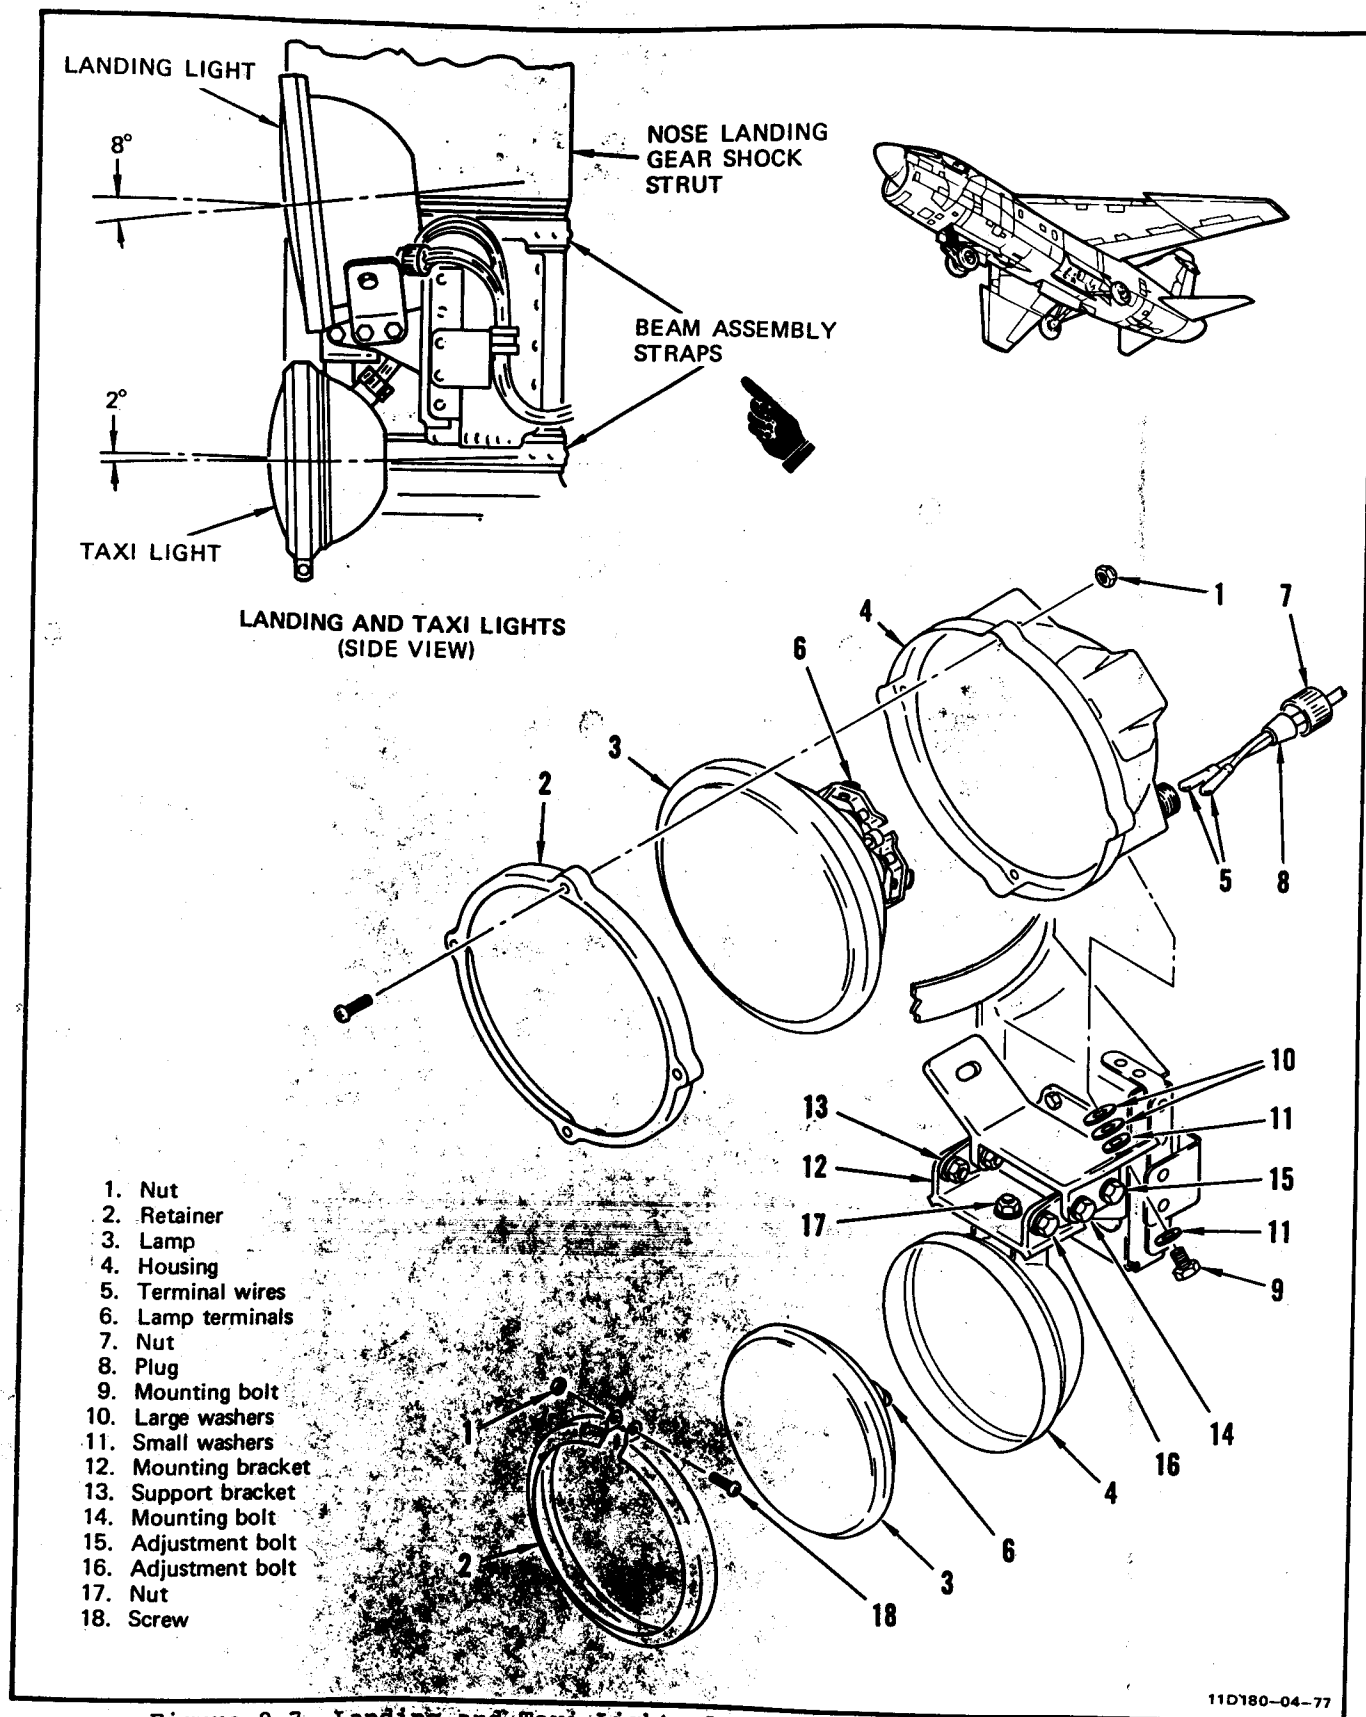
Landing and Taxi Lights Assembly Removal and Installation
